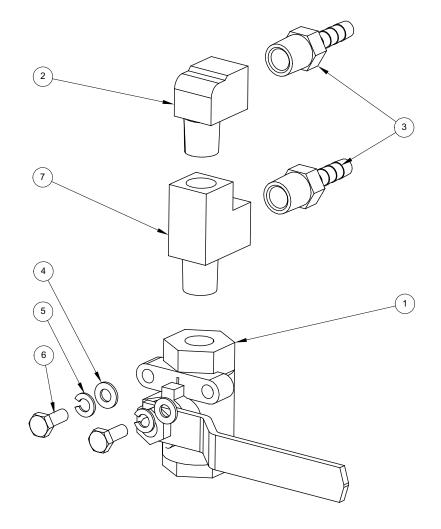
Brow Assembly - Rear View D-5521 Rev D
